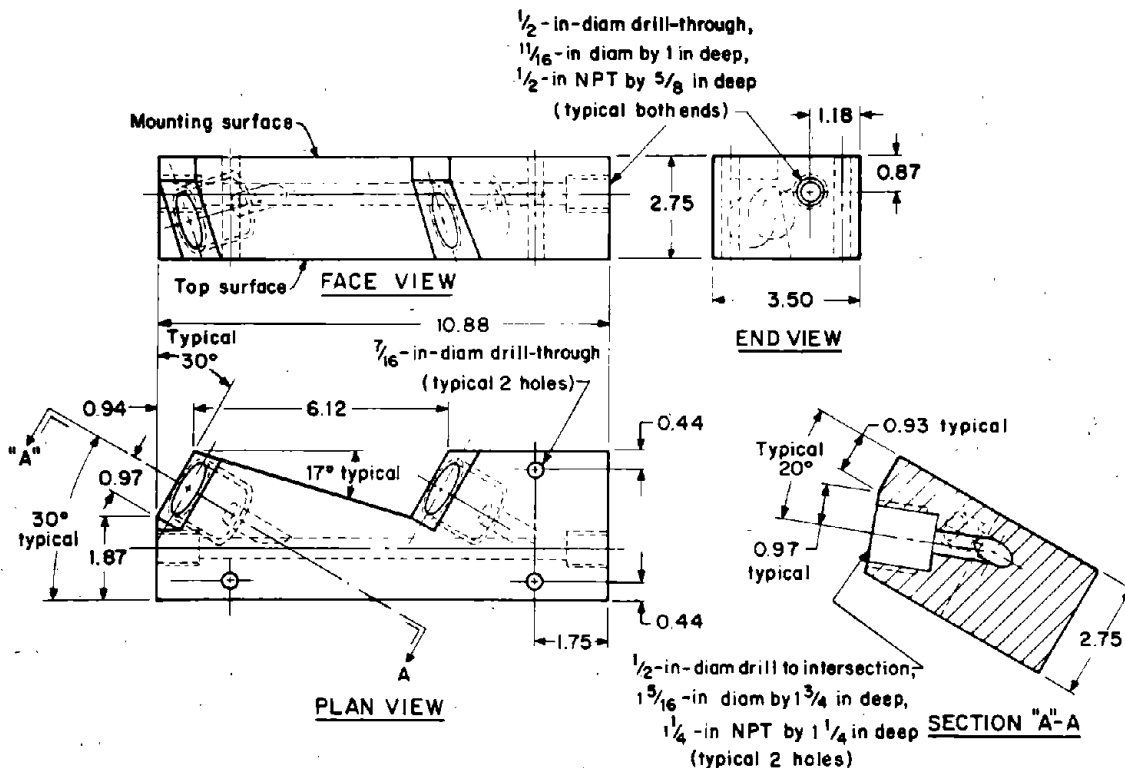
Water spray manifold 4. All dimensions are in inches.
